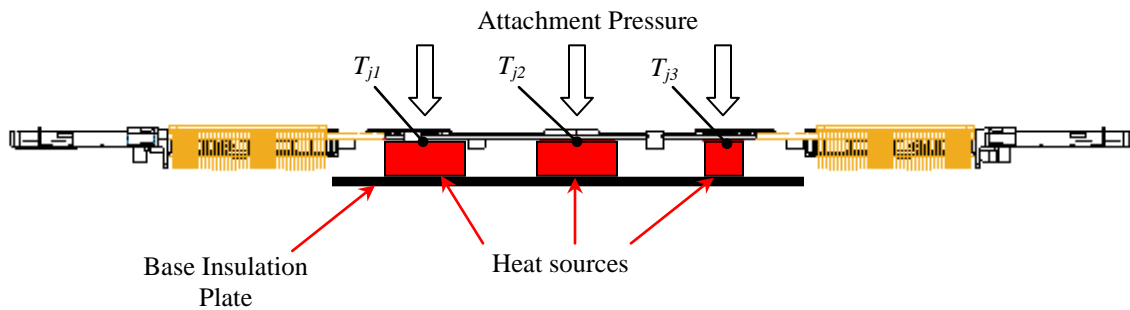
Side View of the Heat Pipe Cooling Unit showing the heater locations
